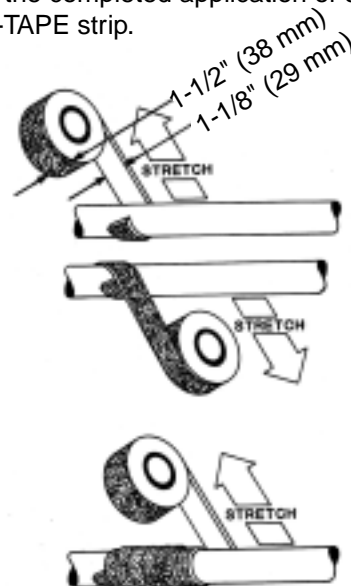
APPLYING LOCK-TAPE STRIP
